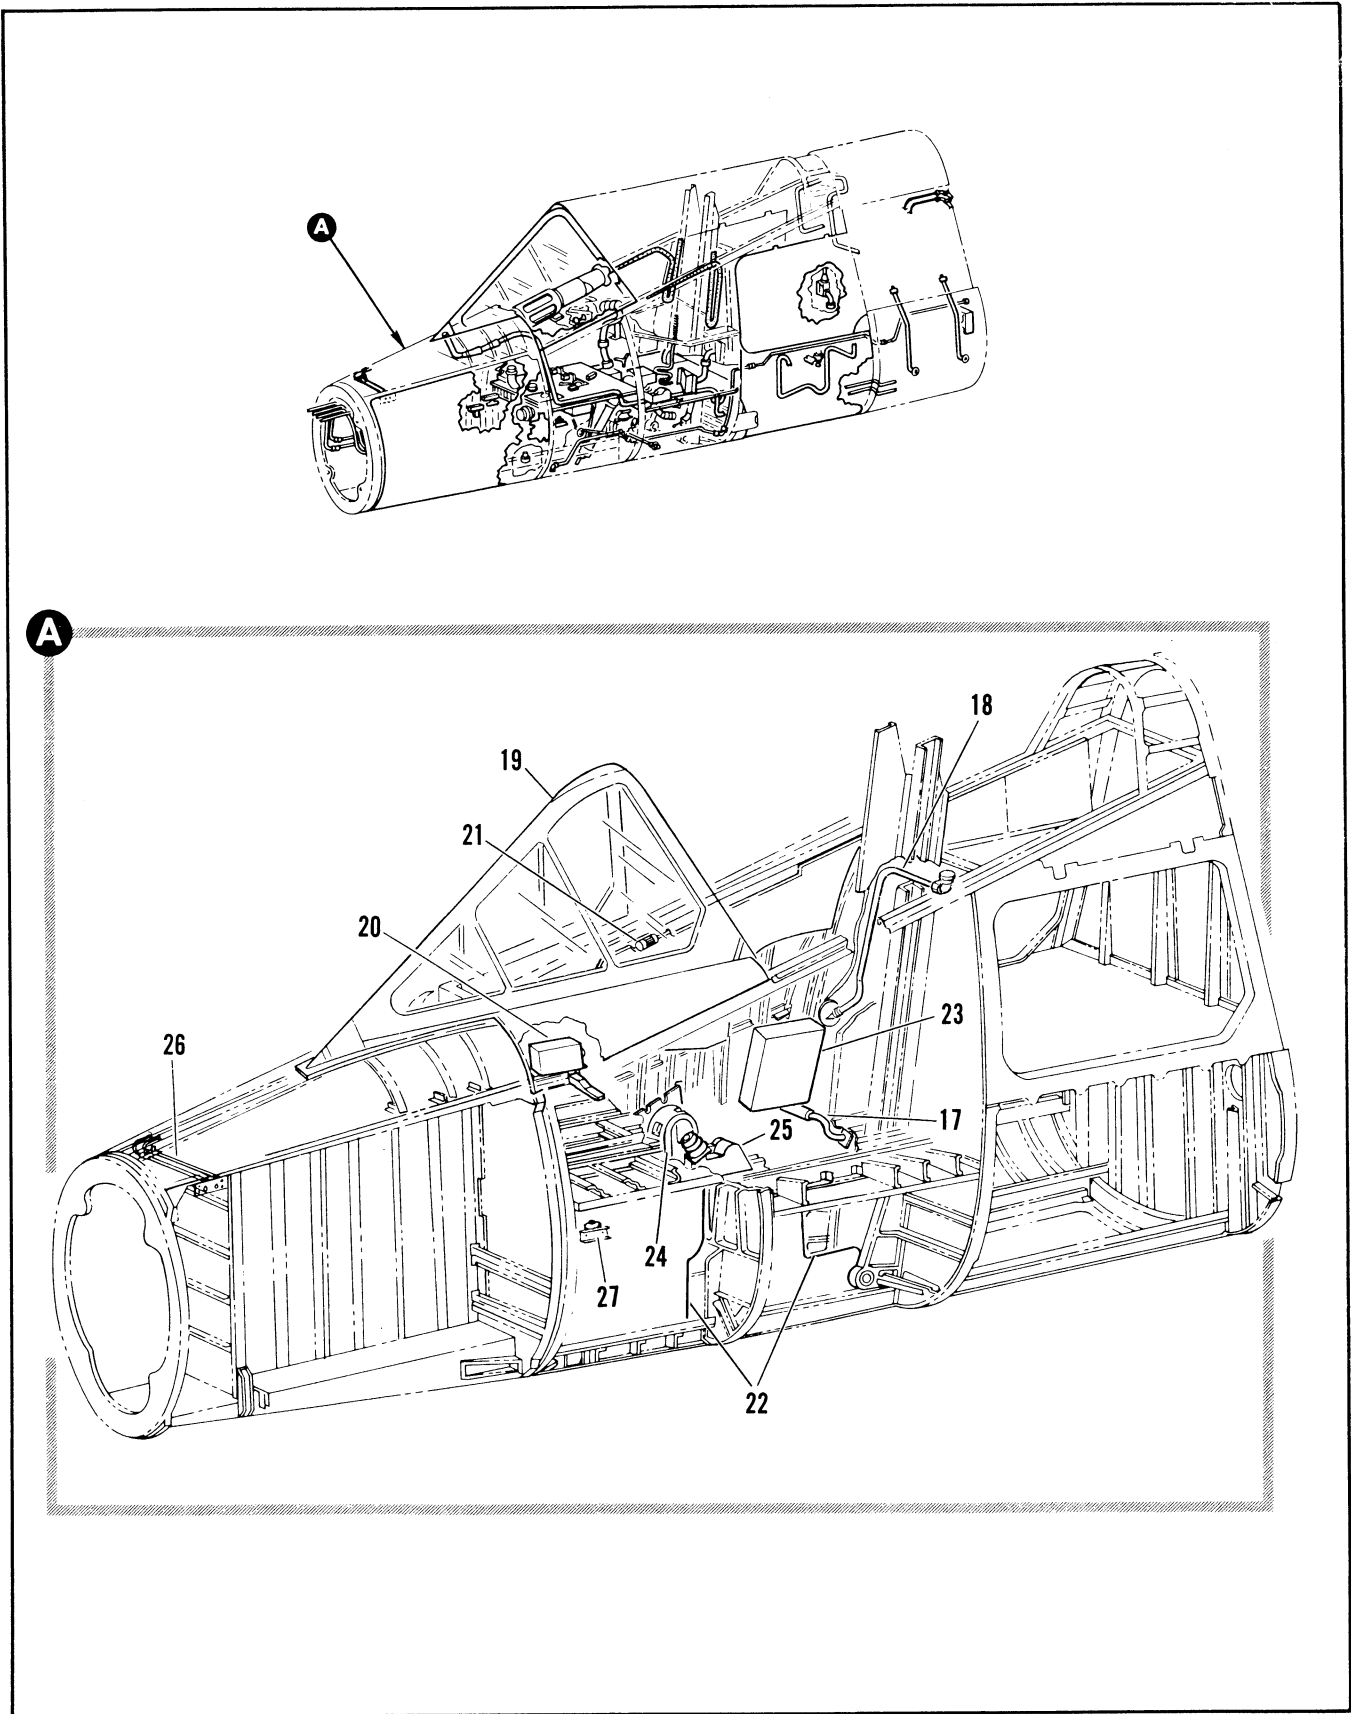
Fuselage Assembly Sta 40 to 216 (Sheet 2 of 6)
